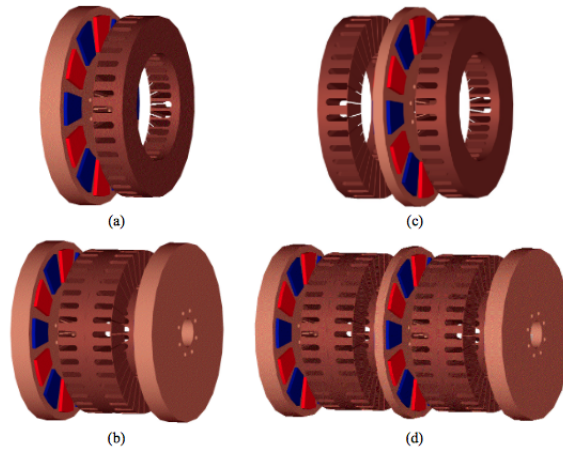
Axial-Flux PMG configurations. (a) Single-rotor single-stator structure. (b) Two-rotors single-stator structure. (c) Single-rotor two-stators structure, called hereafter also as AFIPM machine (Axial-Flux Interior rotor Permanent-Magnet machine). (d) Multistage structure including two stator blocks and three rotor blocks. Figure from [34].
